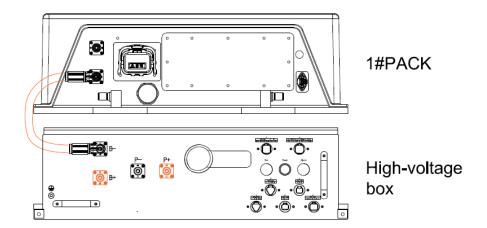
2 Insert the Cable Plugs to Negative Sockets
